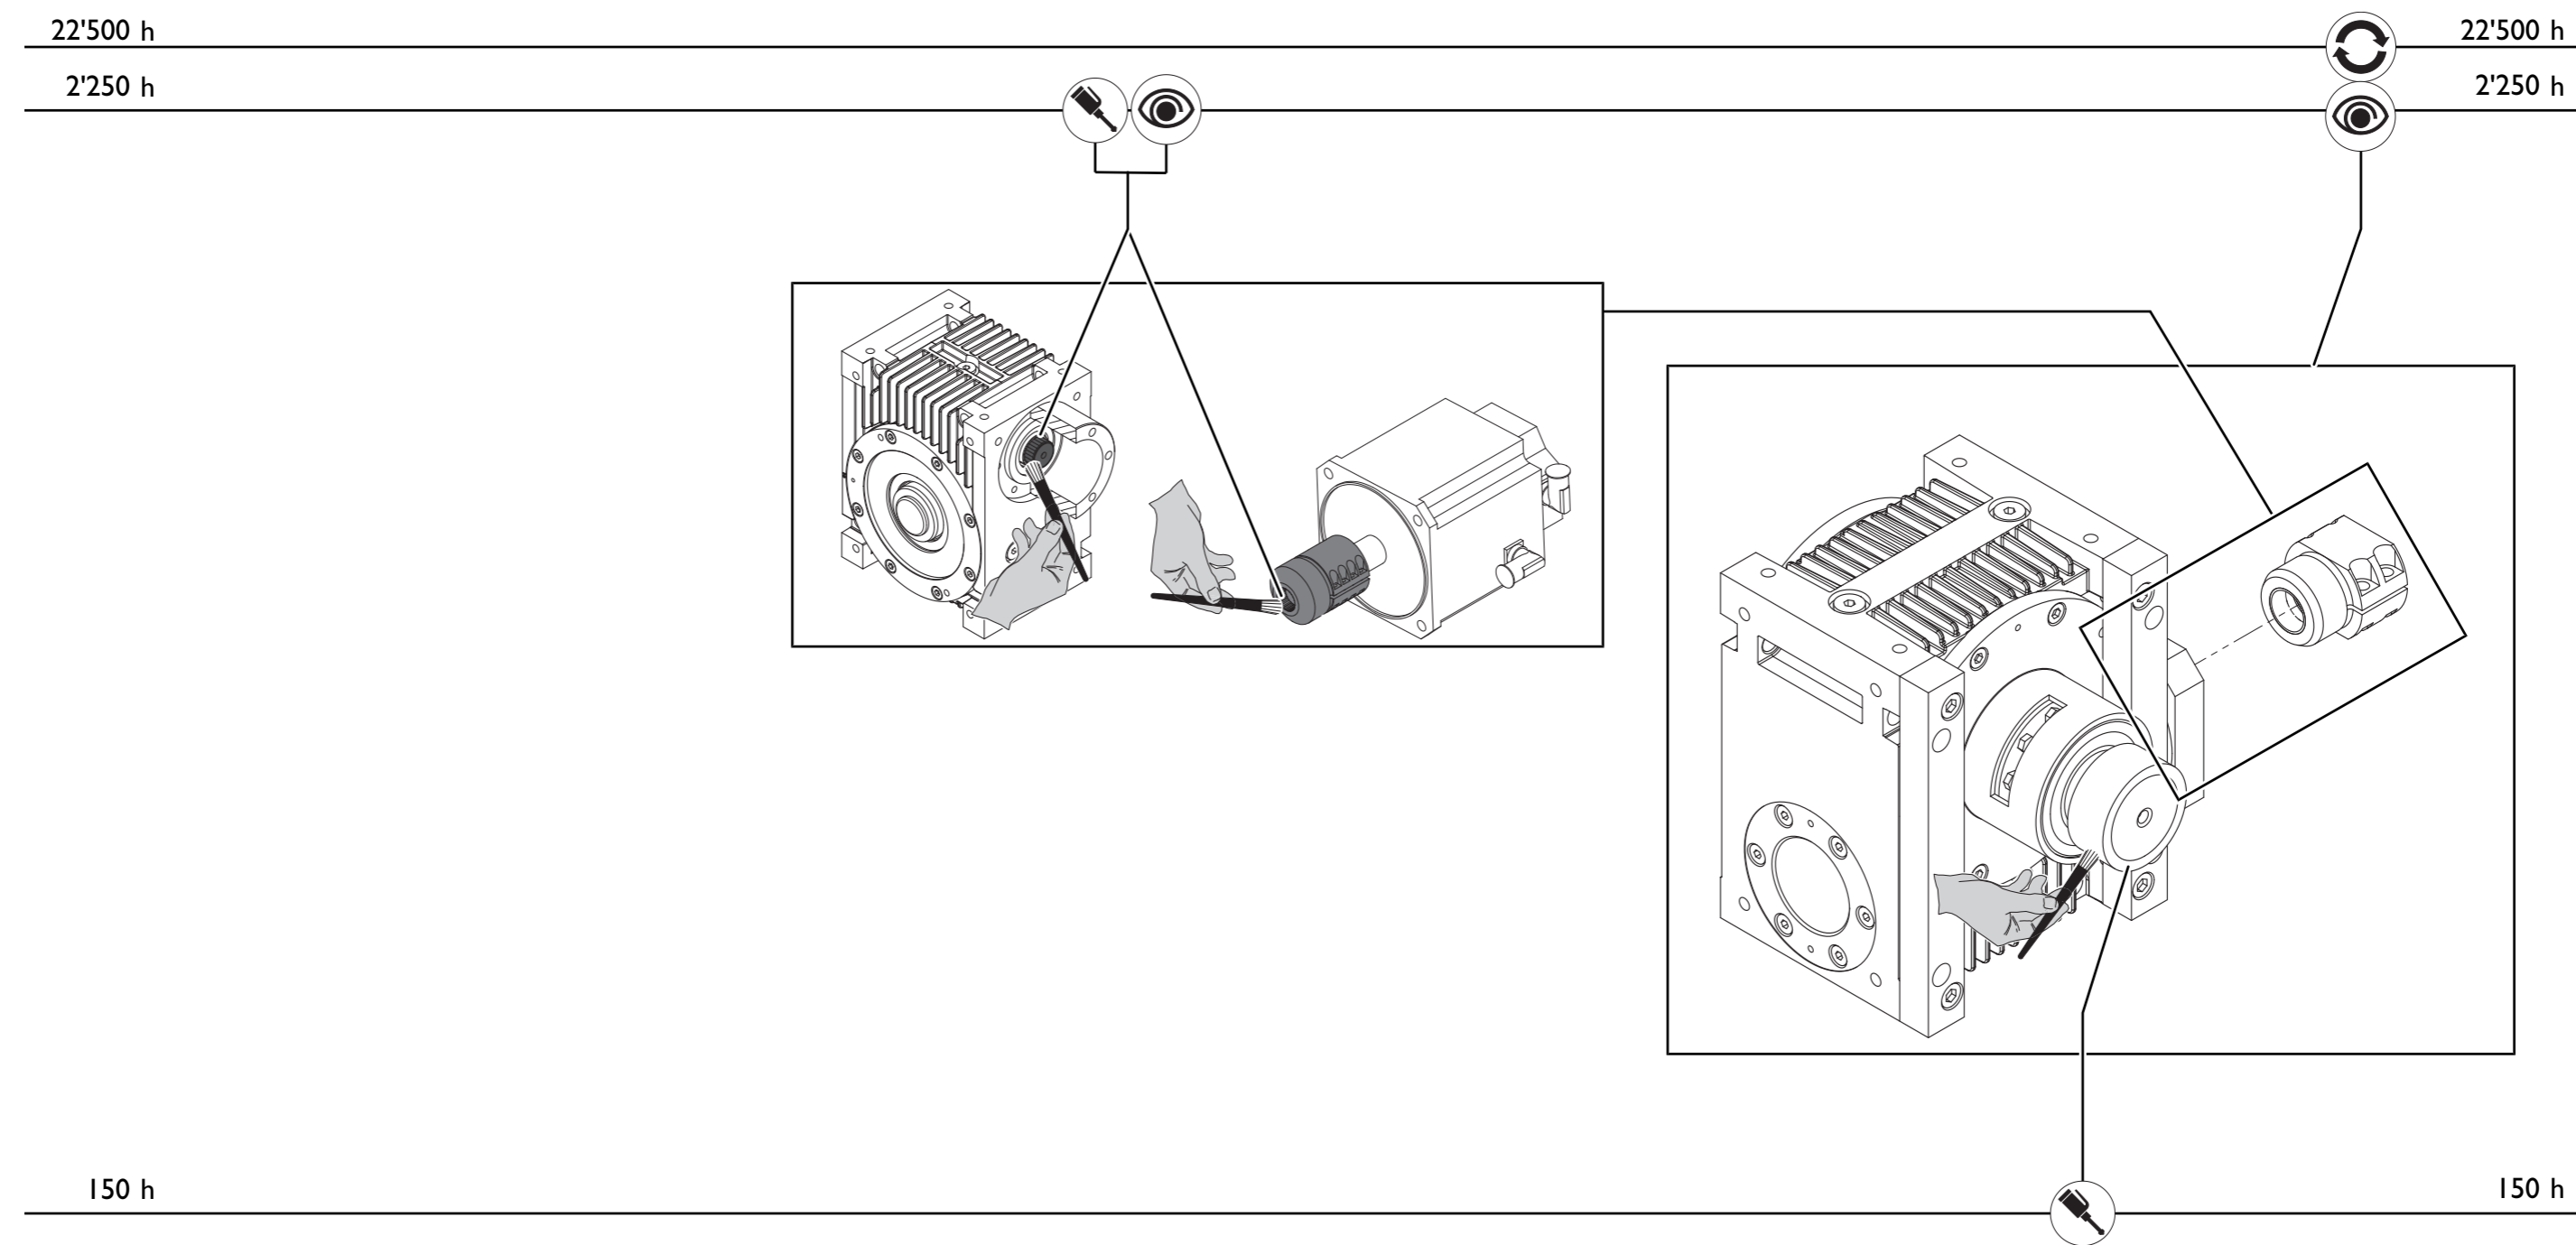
Maintenance schedule: Güdel gearbox unit with multi-tooth coupling
